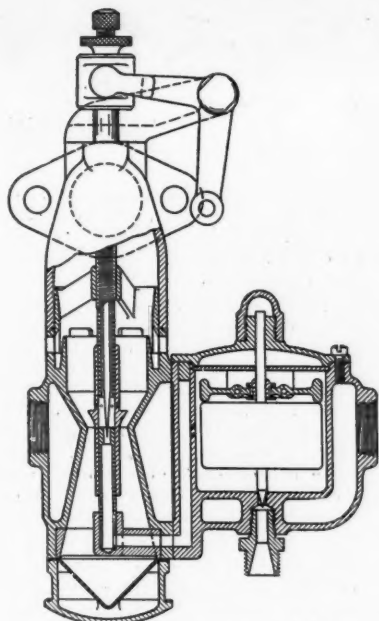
Sectional view of the Senrab kerosene carbureter, the exterior view being shown in Fig. 4.
